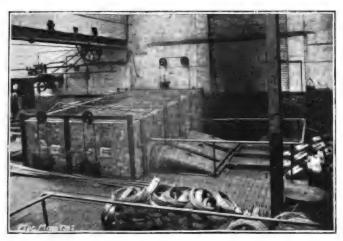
ANNEALING FURNACE AS INSTALLED IN LARGE CABLE WORKS.
